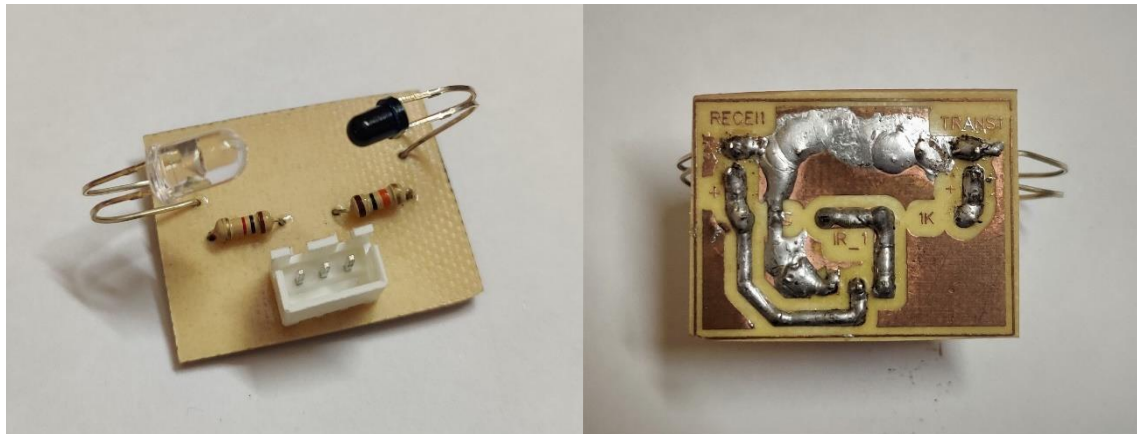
Front and back view of the NIR blood glucose monitoring sensor PCB
